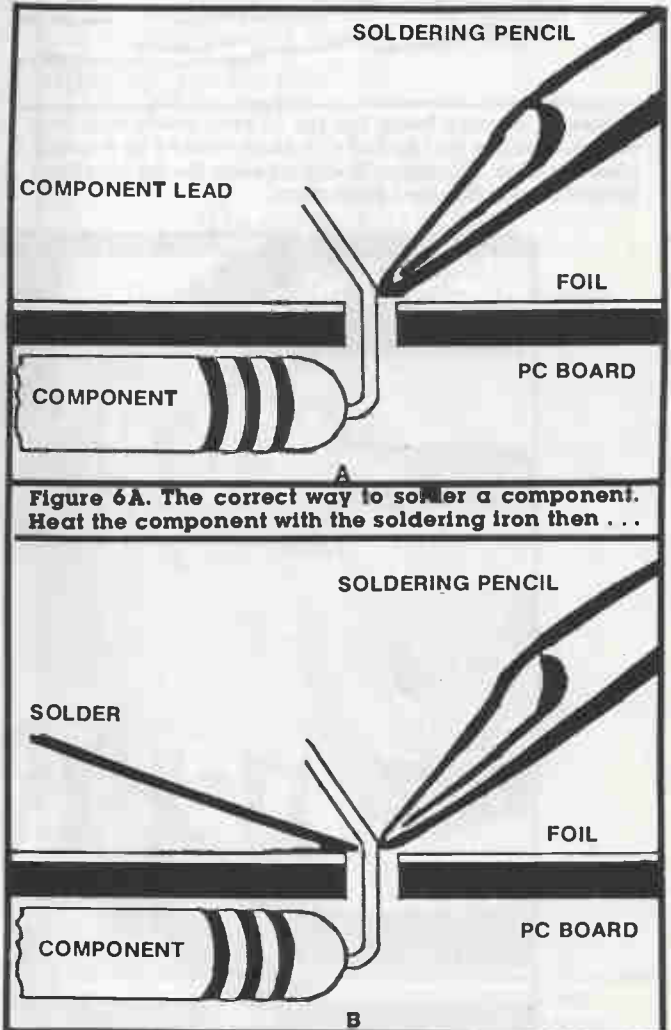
A. The correct way to solder a component. Heat the component with the soldering iron then ...
